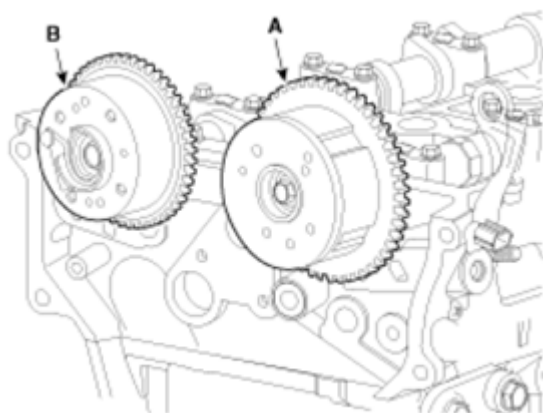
Intake & Exhaust CVVT Assemblies (Dual CVVT)
